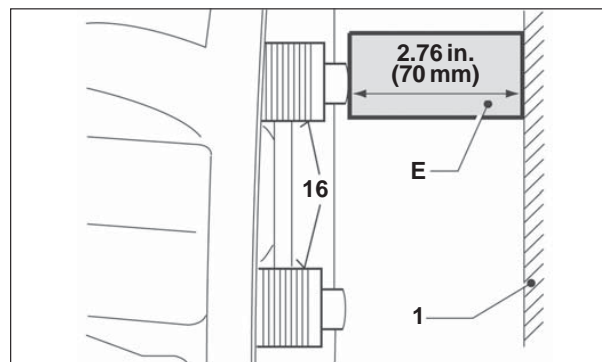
USE OF A SPACER (OFF-VEHICLE INSPECTION)
